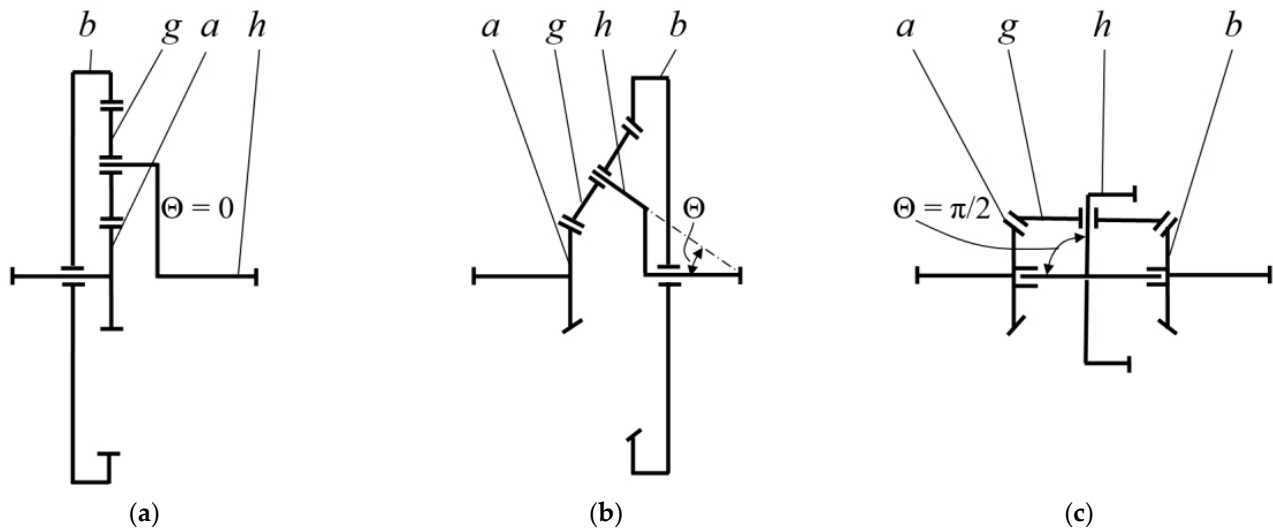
Planetary gear mechanisms with cylindrical (a) and bevel (b,c) gears.
